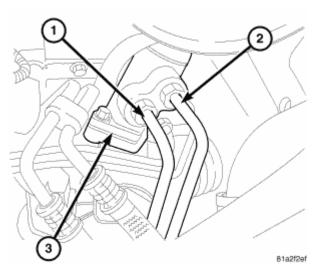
Identifying Power Steering Lines & Gear Courtesy of CHRYSLER LLC
